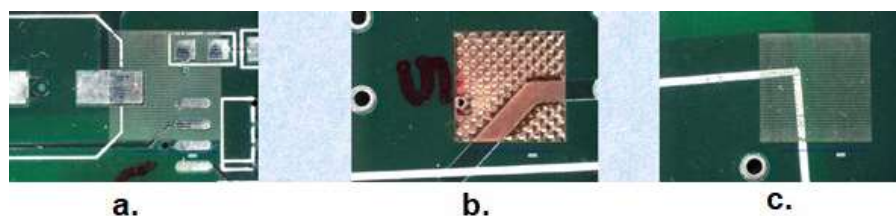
Non-potted PCB Trace and Pad Damage from Ablation Laser
